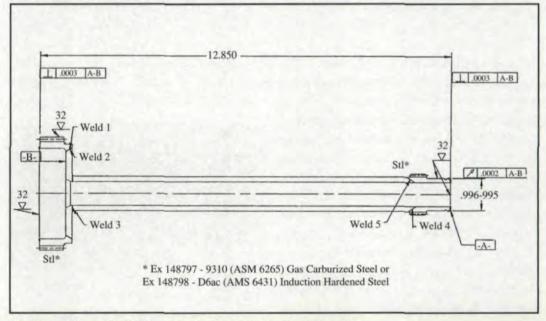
Allison 250-B17F multi-metal sun gear shaft weld locations.
